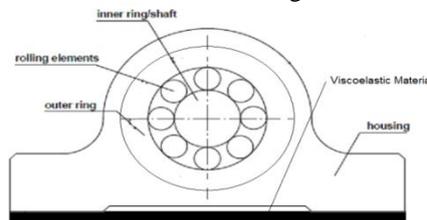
A Viscoelastic Layer Mounted Beneath The Bearing Housing
